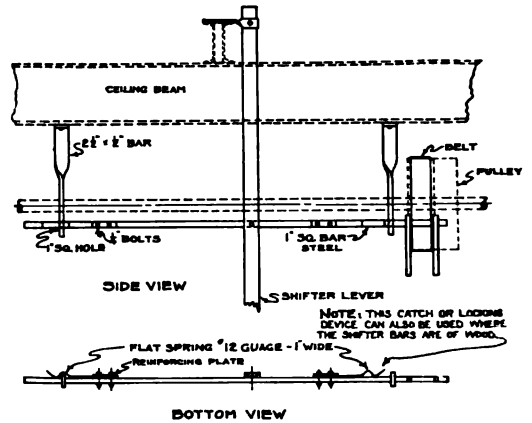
Locking Shifter for Counter-Shaft. (Amer. Steel and Wire Co.)
